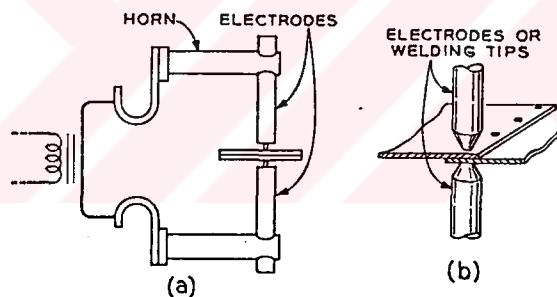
(a) Sketch of spot welding circuit. (b) spot weld.
